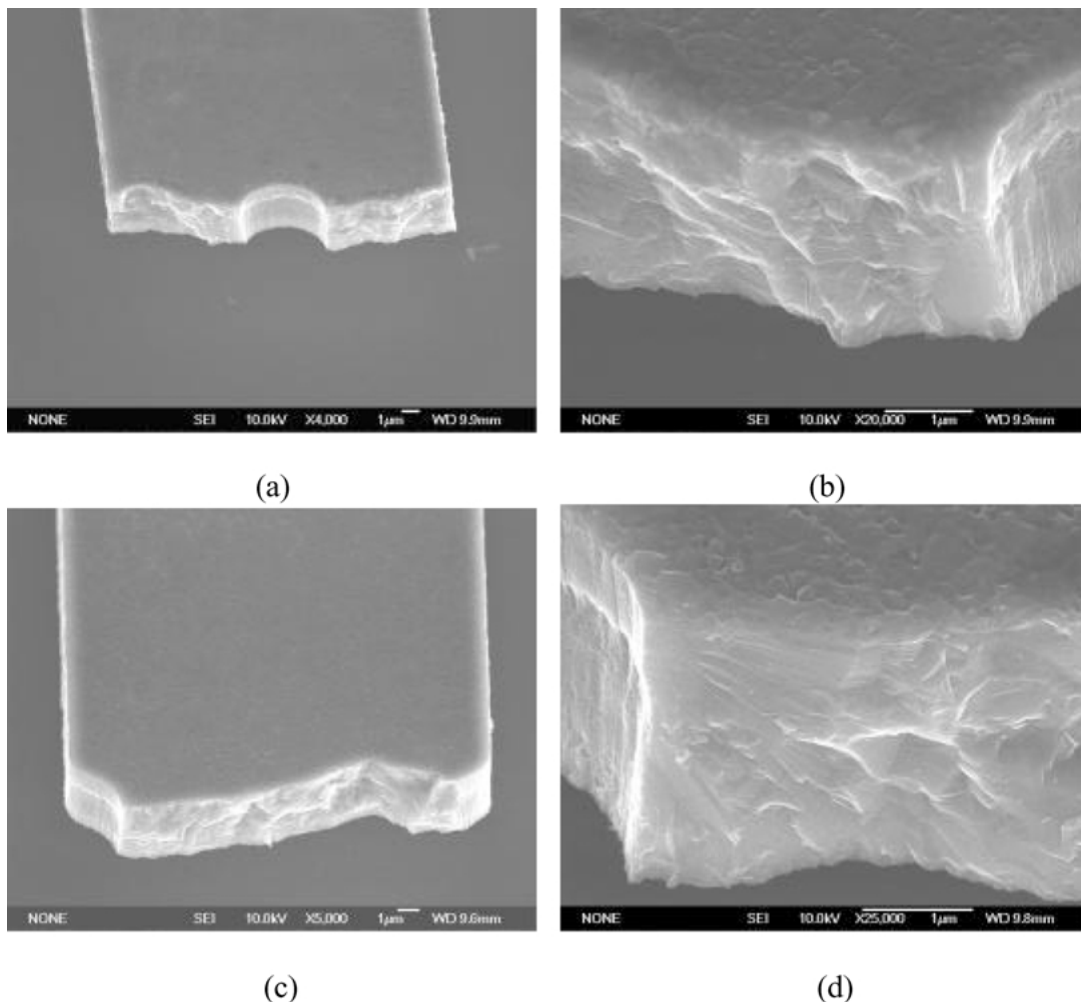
Overview of the fracture surfaces of a hole specimen (a) and a notch specimen (c). Both are 20 μm wide. Magnified views of the locations where failure initiated are shown on the right.
